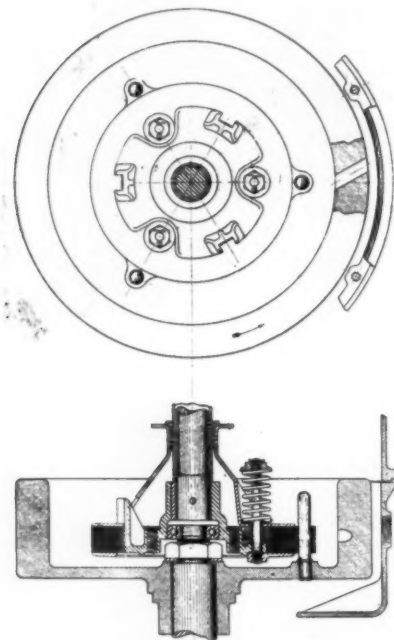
Plan and Section, Chalmers-Detroit Multiple-Disc Clutch.
